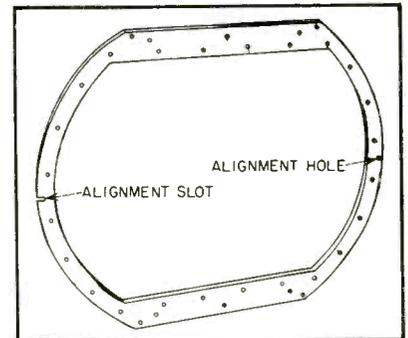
Spacer frame. Aperture mask is bolted to one side of this frame, glass plate, carrying phosphor dots, to other side. Screen assembly is then bolted inside metal shell
